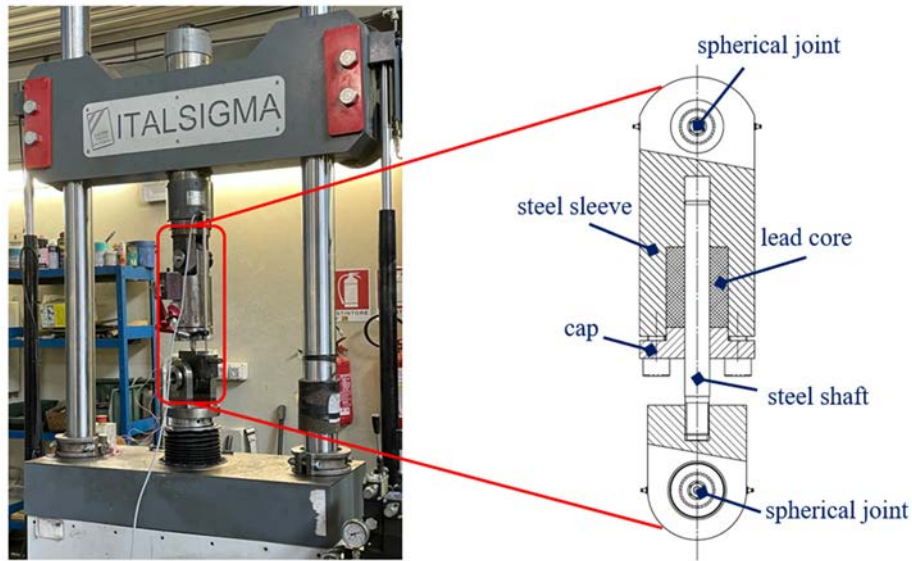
One of the prototypes on the testing machine and its section view with nomenclature of the PS-LED main parts.
